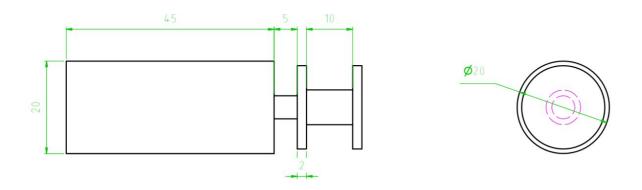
Isometric Drawing of Final Design]
